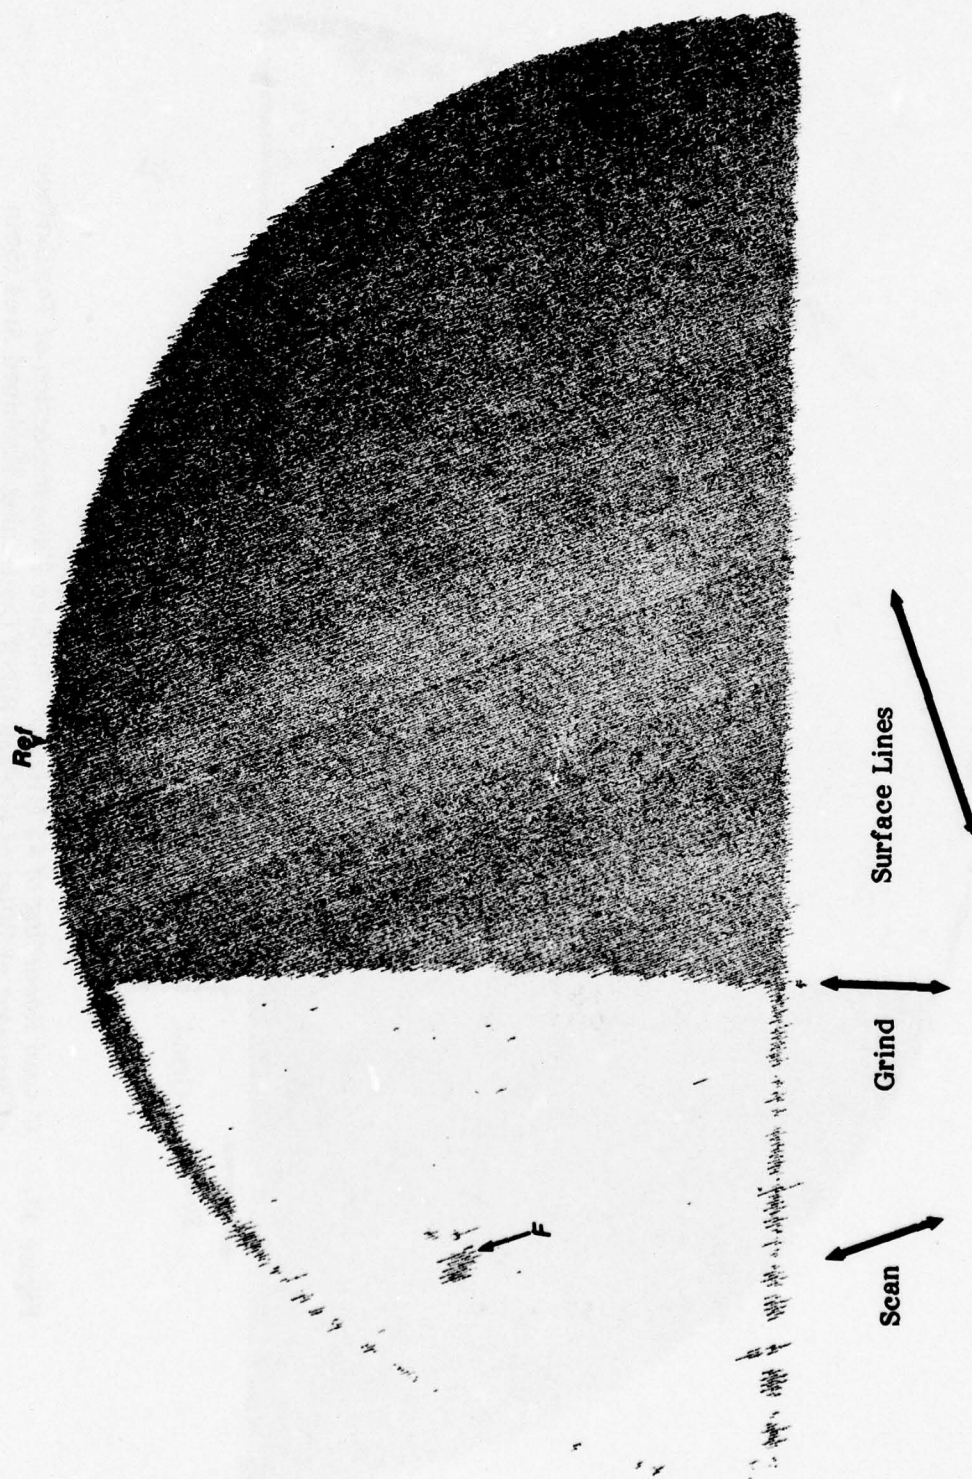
C-Scan Recording of 45 MHz, 18° Surface Wave Inspection of Top Surface of Segment of Billet of NC-350 RBSN Containing Machined Area (Scan Perpendicular to Surface Lines).
